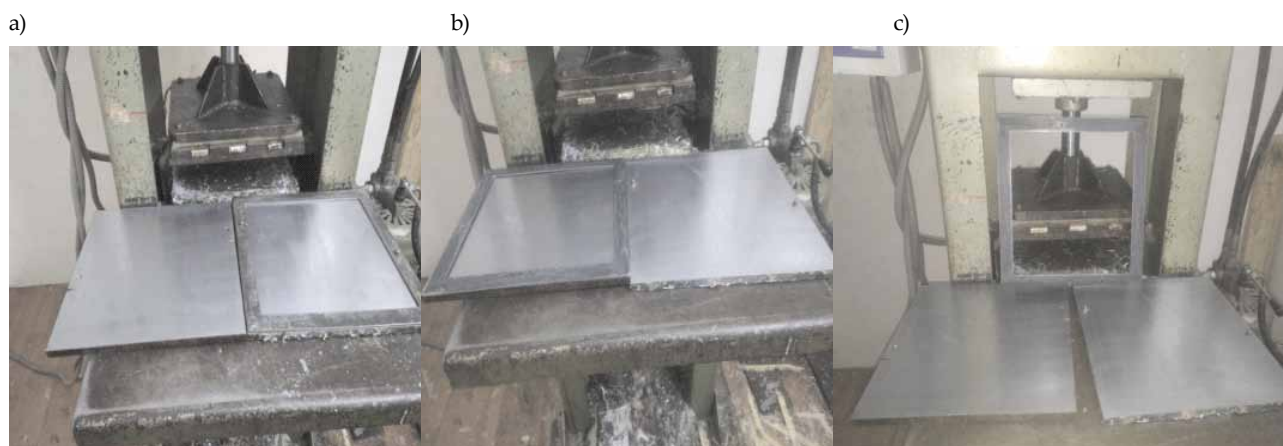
Compression molding machine: a) spacer in male die, b) spacer in female die, c) without spacer
